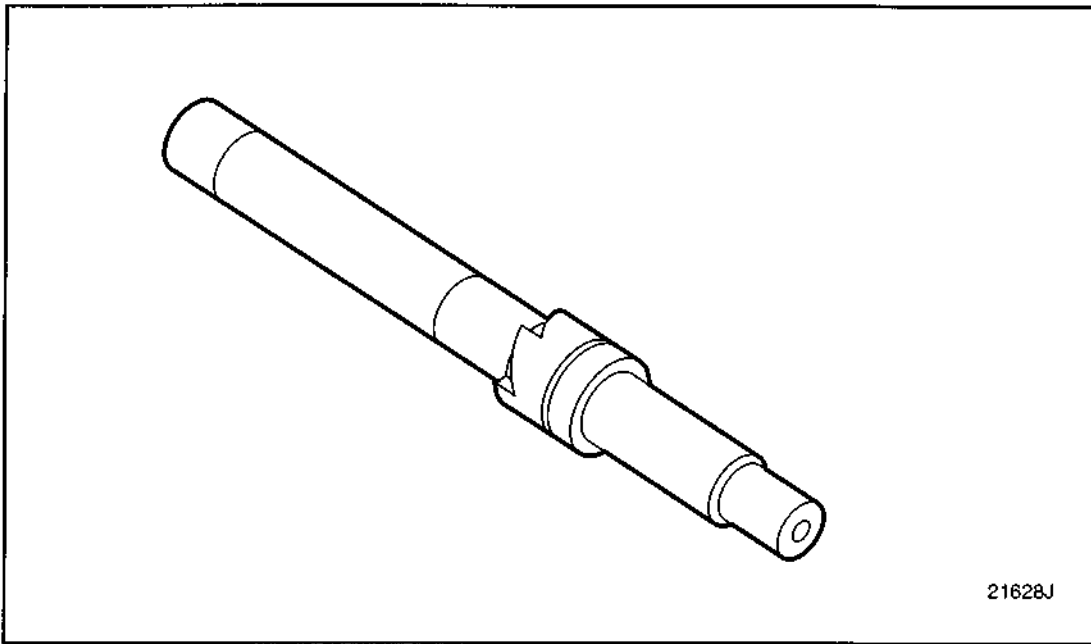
Head Bolt Counterbore Cutter, J 38189
